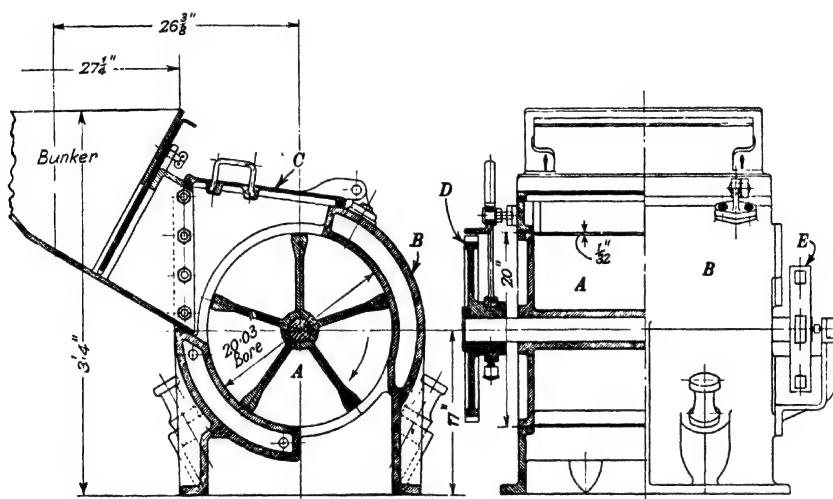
COAL FEED DRUM FOR CAMDEN GAS MACHINE.
